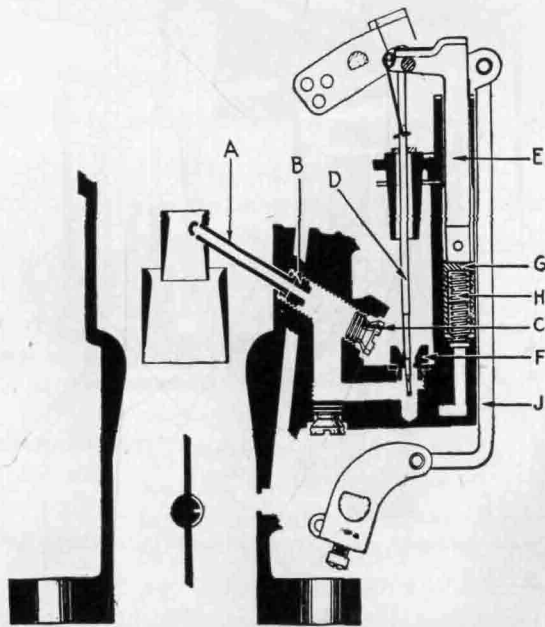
Combination mechanically operated and vacuum-operated full-power circuit. Both vacuum-piston and throttle positions control position of metering rod. A, nozzle; B, retainer plug; C, plug; D, metering rod; E, linkage; F, metering-rod jet; G, vacuum piston; H, spring; J, linkage to throttle. (*American Motors Corporation*)
